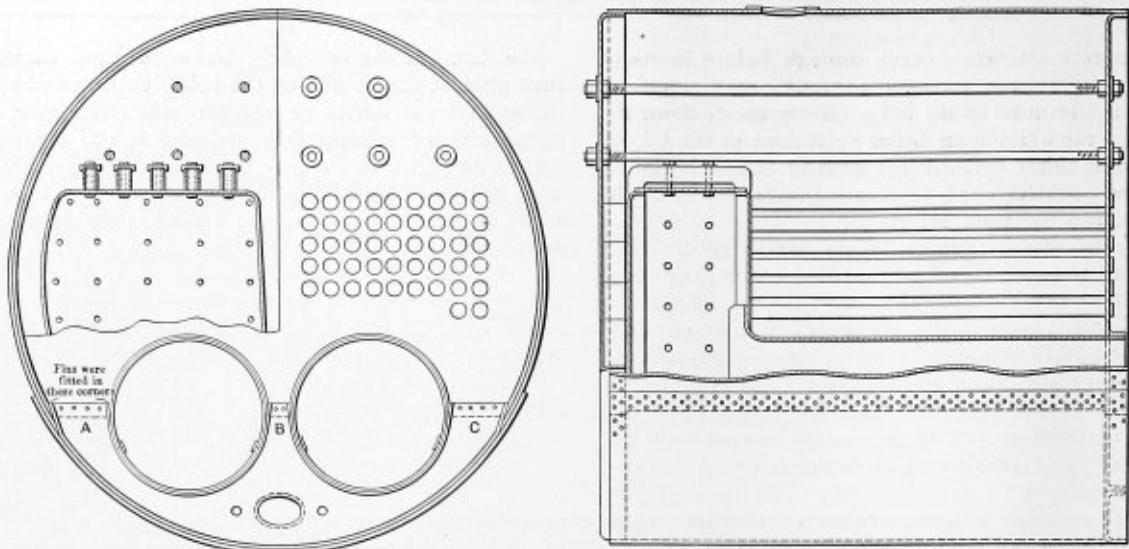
PARTIAL SECTION OF CORRODED BOILER, SHOWING PORTION OF HEAD AND SHELL REMOVED.
